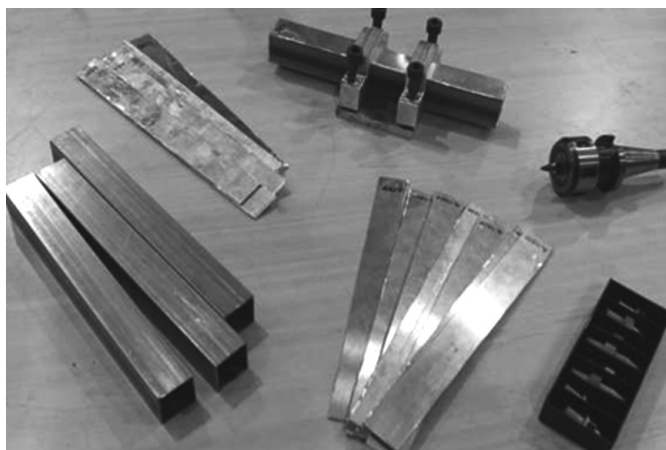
Workpieces: sheets, tubes and clamping adaptor.
